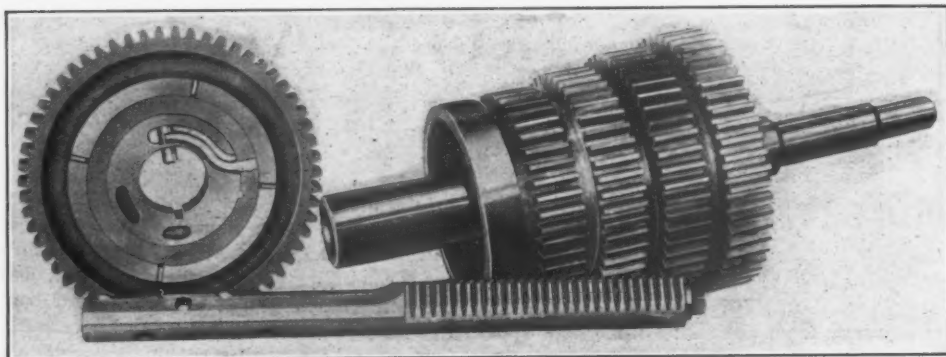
Parts of the Speed Box, Showing the New Friction Mechanism.
